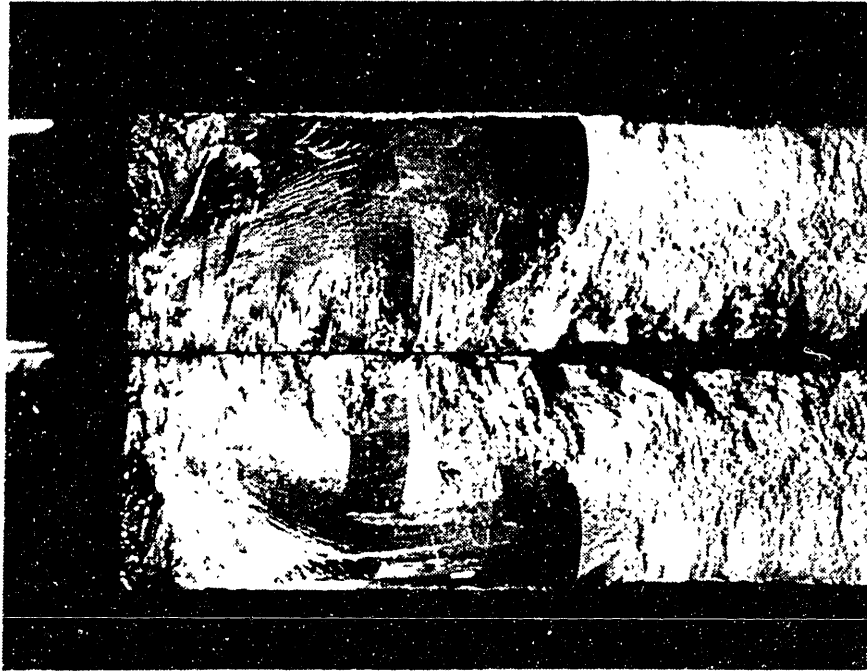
Surface of J-integral tested specimen, showing preferential crack growth near the face of weld.
